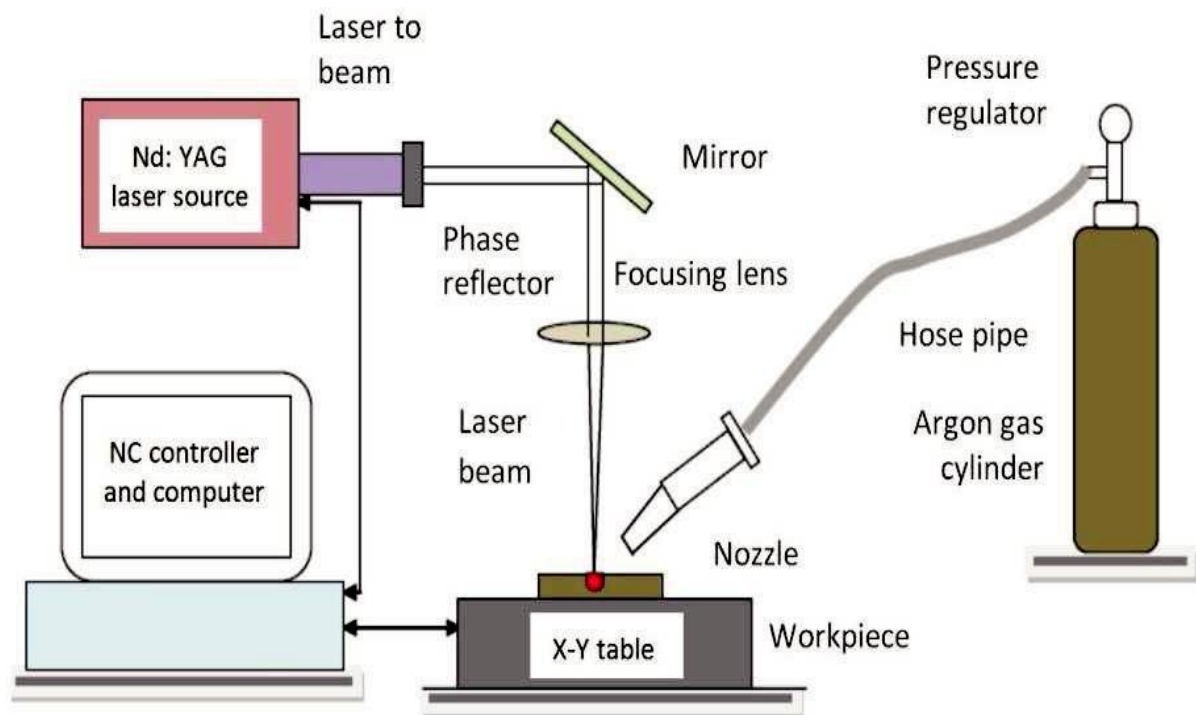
Schematic diagram of Laser welding [18]
